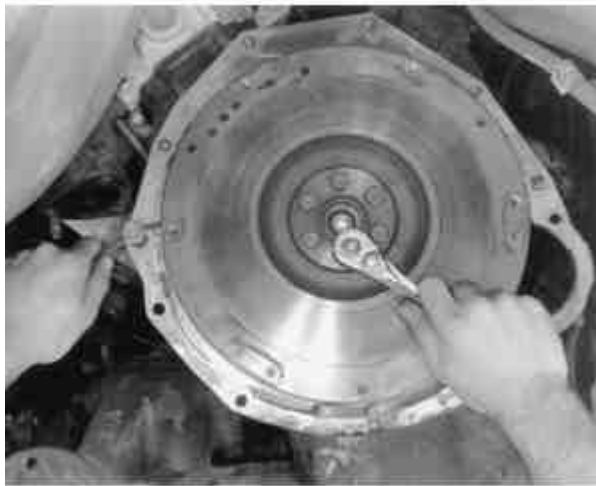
Remove the flywheel, do not forget to check the pilot bushing
